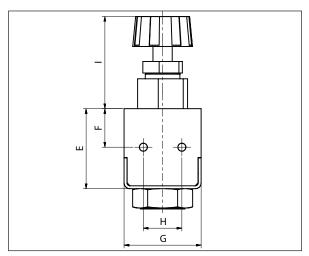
Head dimensions (with or w/o valve) with tapped holes for option /QB
